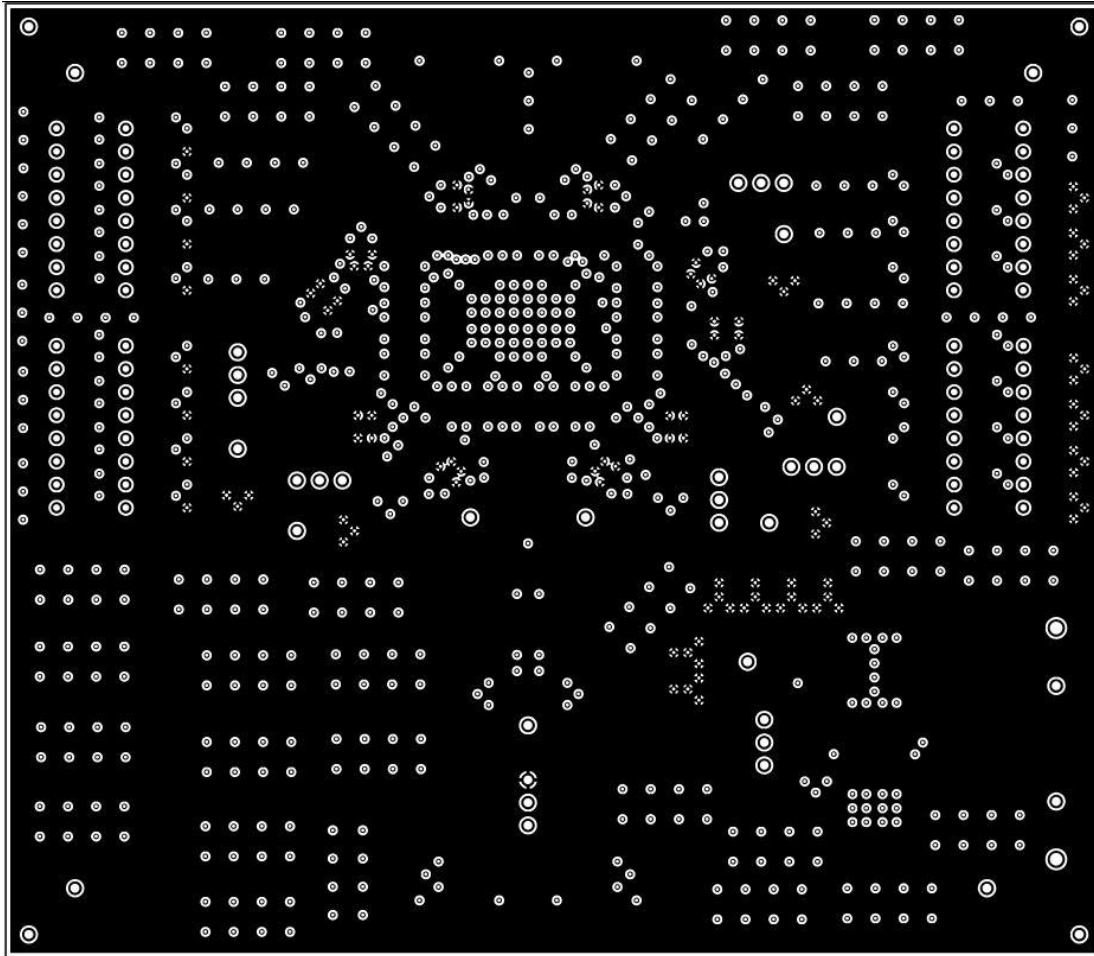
Power Plane (3rd Layer) of the Test PCB
